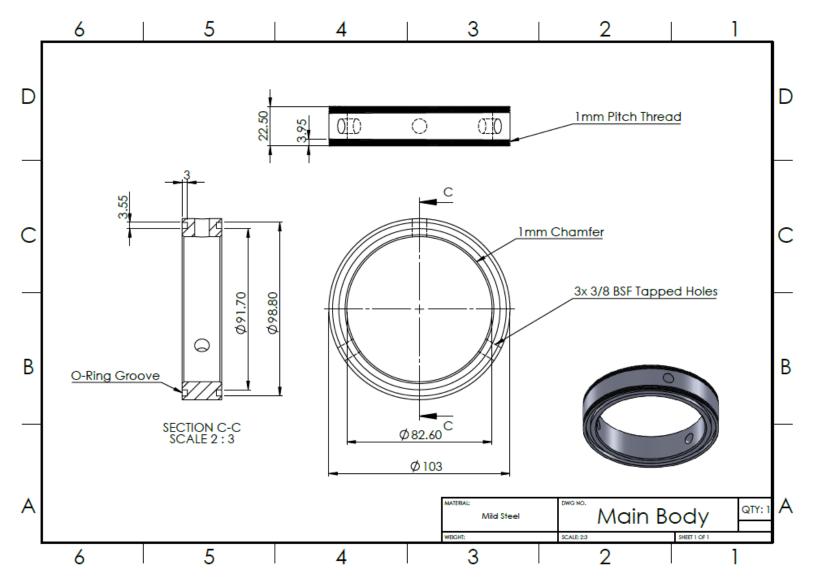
Mechanical drawing of the main body component with dimensions (mm)
